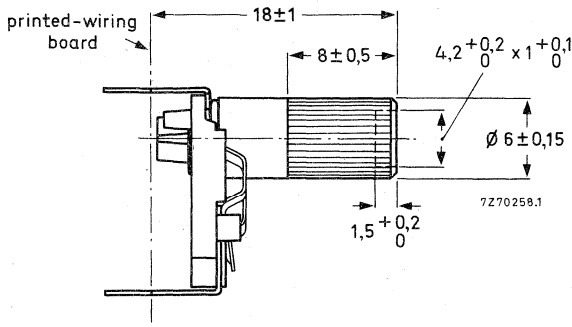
Test switch for horizontal mounting with adjustment knob at the side of the selector contact.
